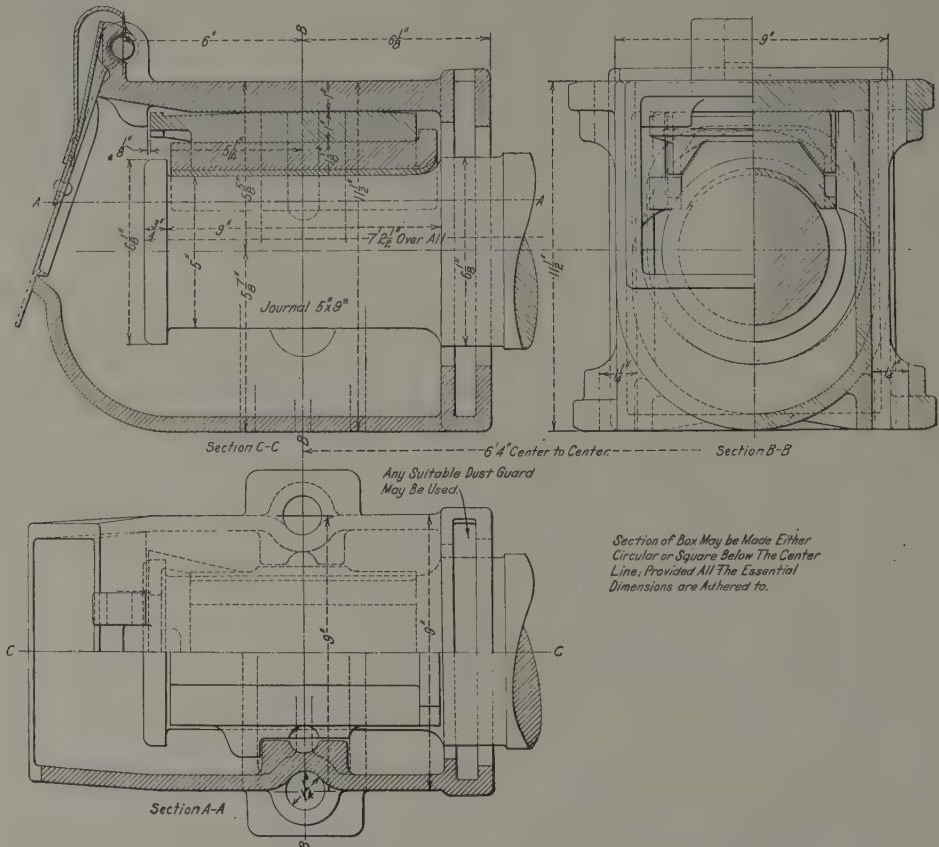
M. C. B. Standard Box and Contained Parts for 5 in. by 9 in. Freight Car Journal. (M. C. B. Sheet 7.)
